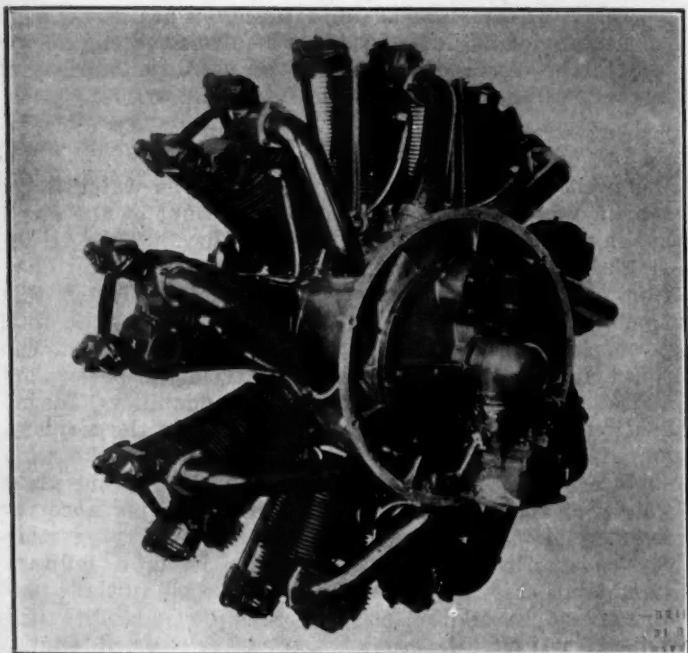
WRIGHT P-2 ENGINE, THREE-QUARTER REAR VIEW
